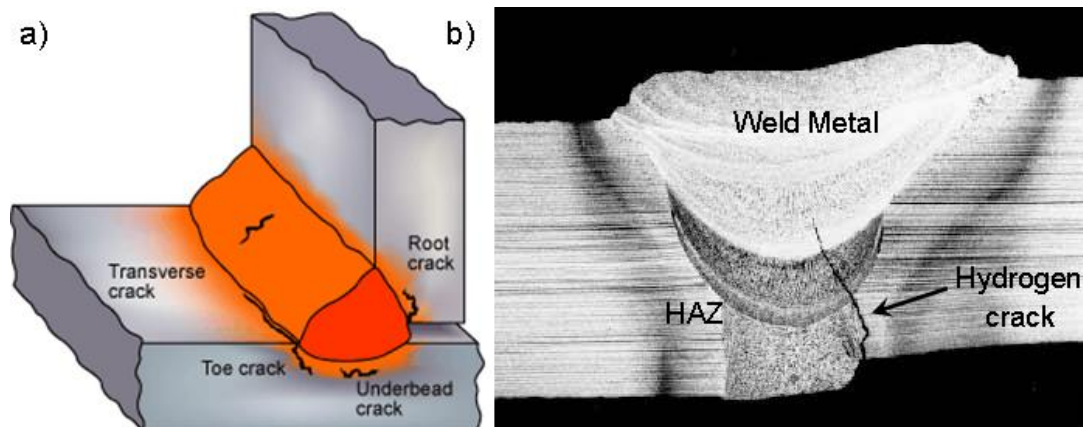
a) Hydrogen cracks originating in the HAZ and weld metal of a fillet weld, note that multiple types of cracking would not be expected to form in the same weld. From [79] ; b) A typical example of a root HAZ hydrogen crack that has extended into the weld metal of a butt welded joint. Adapted from [5].
